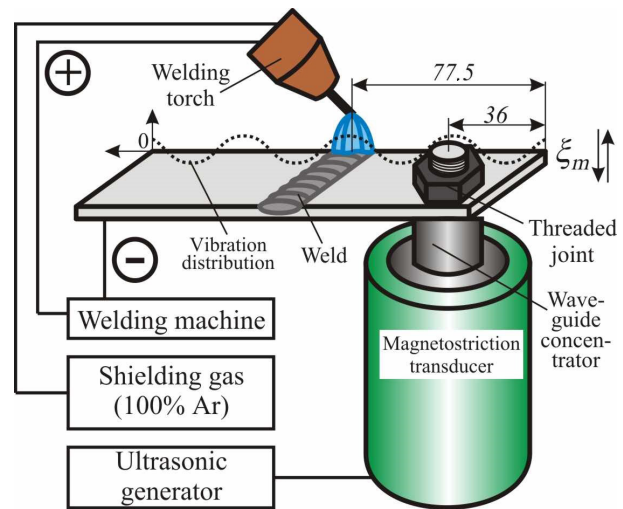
(Color online) Experimental scheme of welding with ultrasound.
